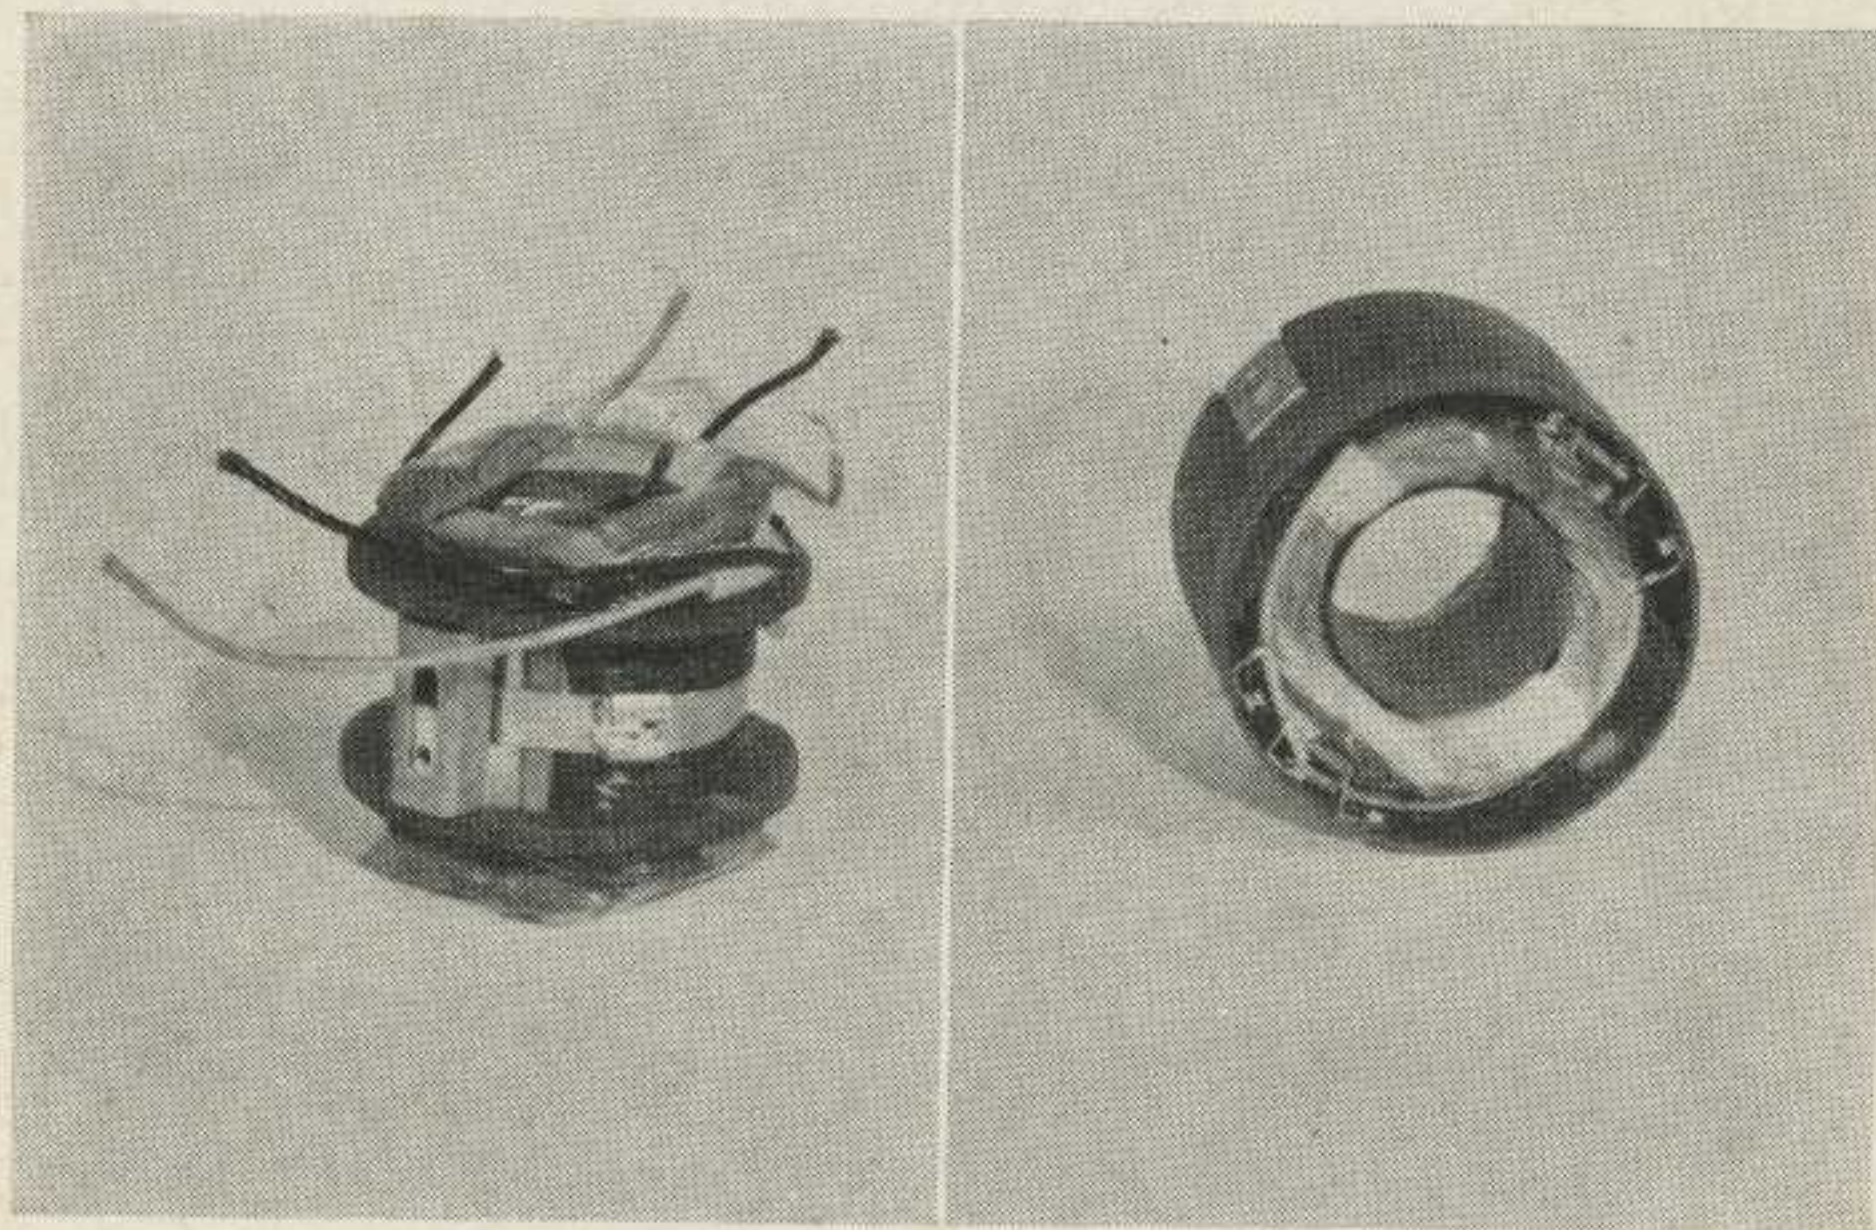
Unmounted deflection yoke with iron wire-wound core. A molded iron-dust core may be used on this same yoke without other alterations.
